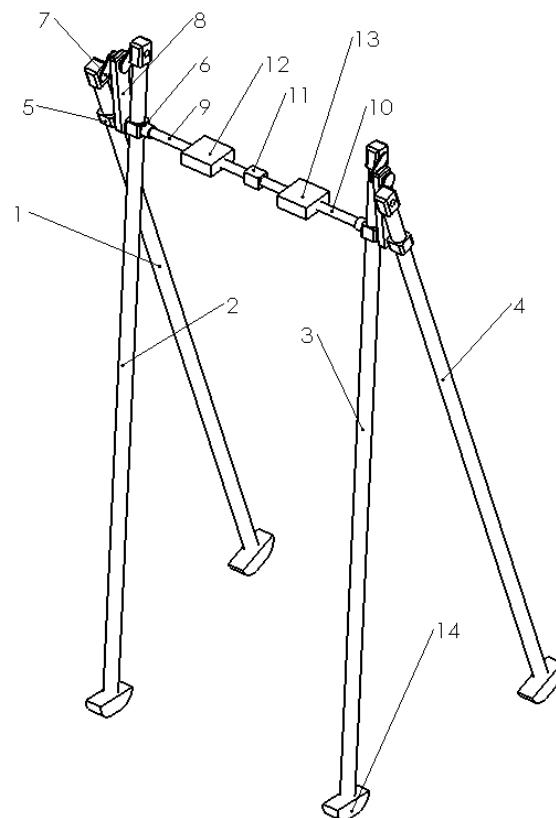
Outer leg I , 2-Inner leg I , 3- Inner leg II , 4-Outer leg II , 5-shaking block I , 6-rocker, 7,12-crank, 8-support plate, 9-steering rod I , 10 steering rod II , 11-Connection module, 12-drive device, 13-master control device, 14-data acquisition device.
